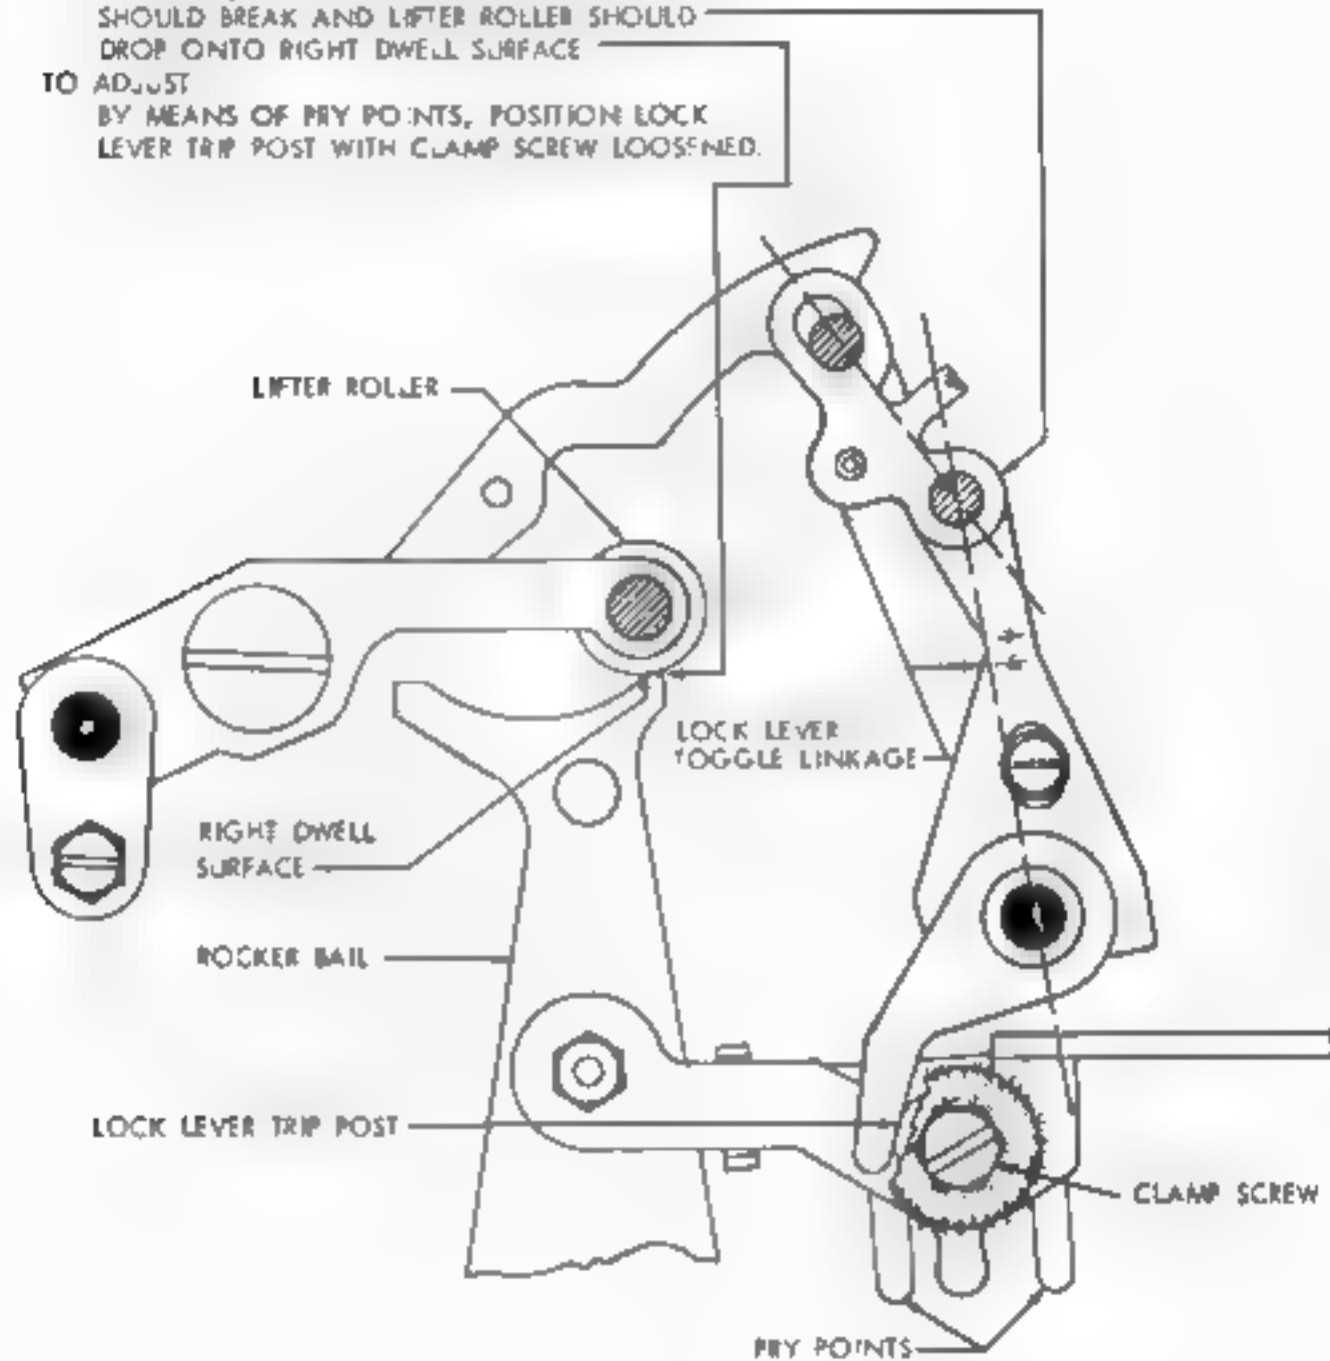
PERFORATOR AND TRANSFER MECHANISMS
